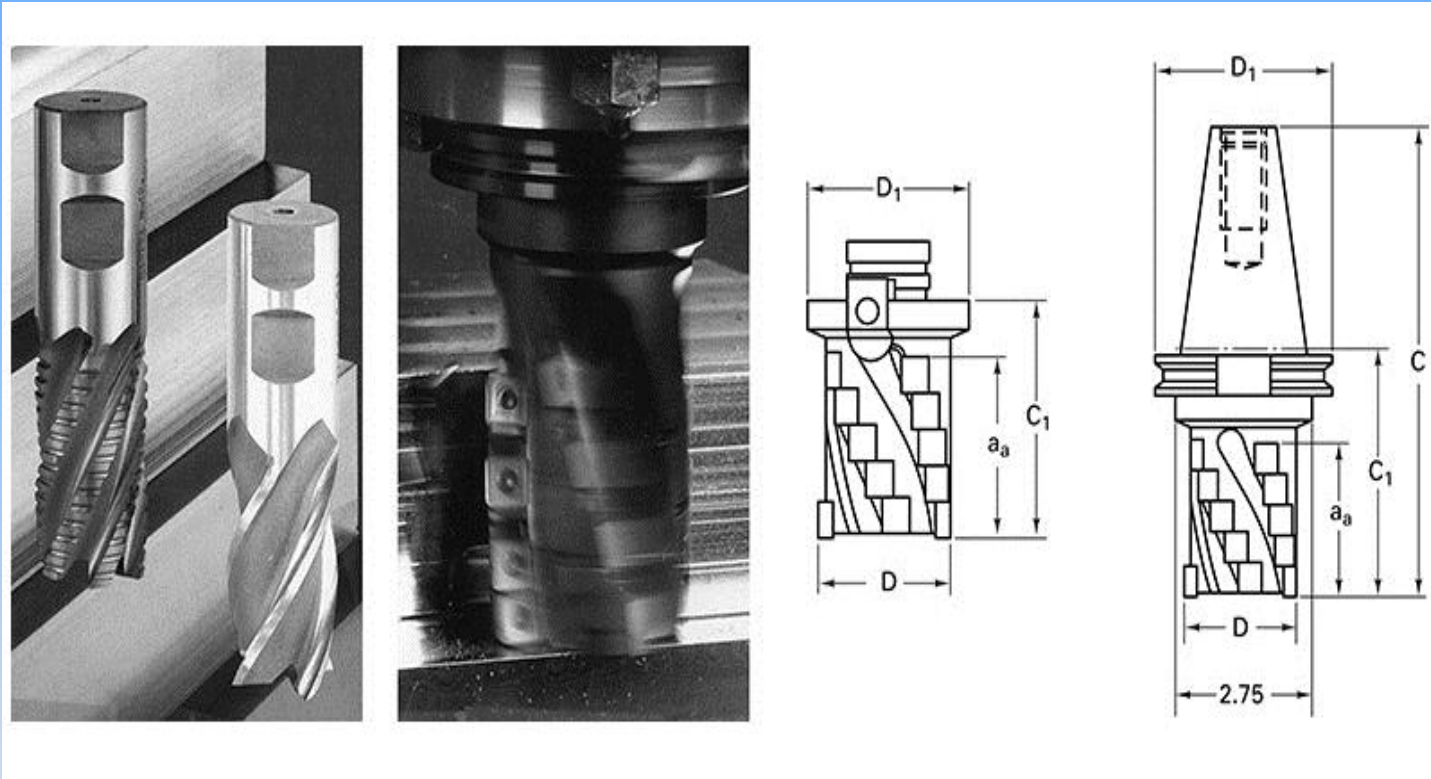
Solid end mills are often coated. Insert tooling end mills come in a variety of sizes and are mounted on taper shanks.
